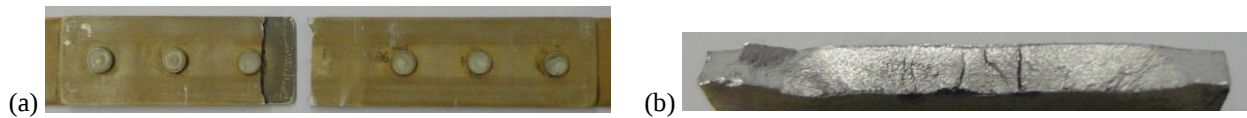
Specimen IA-21 (130 MPa): (a) fracture SP-NC; (b) fractured cross-section
